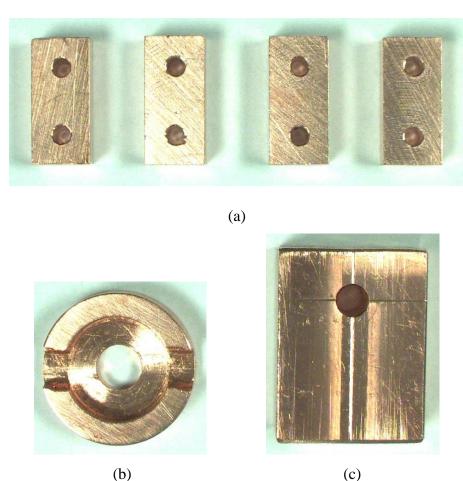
Other manufactured ICLD copper structures: (a) rectangular and (b) circular blocks for anode and cathode connection between top and bottom side PCBs, and (c) thermal mass for low-side JFET
